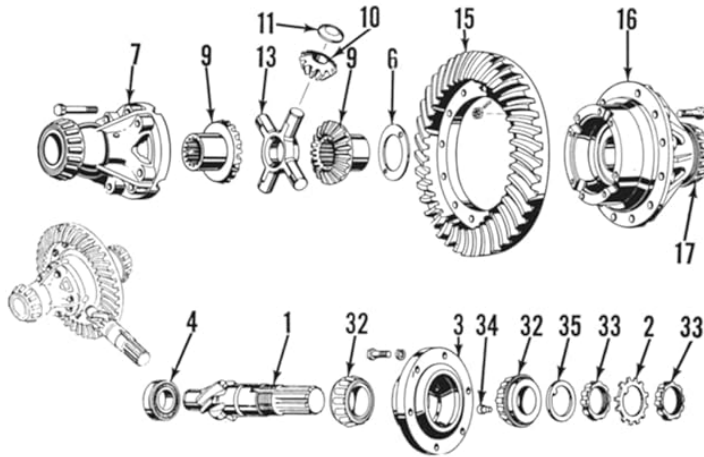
TO30 differential, main drive bevel pinion and ring gear and components. Special heat-treated bolts for attaching the bevel ring gear to the differential case instead of rivets are being supplied for service. TE20 and TO20 are similar.
